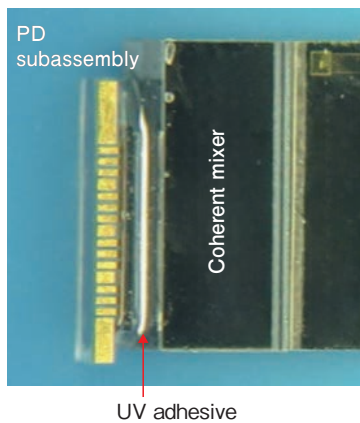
Photograph of the coherent mixer with the PD sub-assembly.
